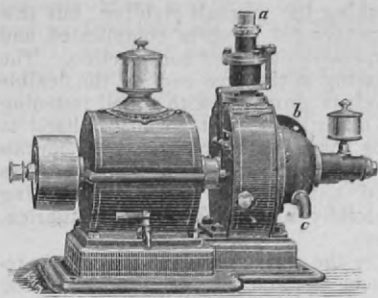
Perspective.—a, Steam Inlet.—b, Steam Exhaust.—c, Condensed Water.
